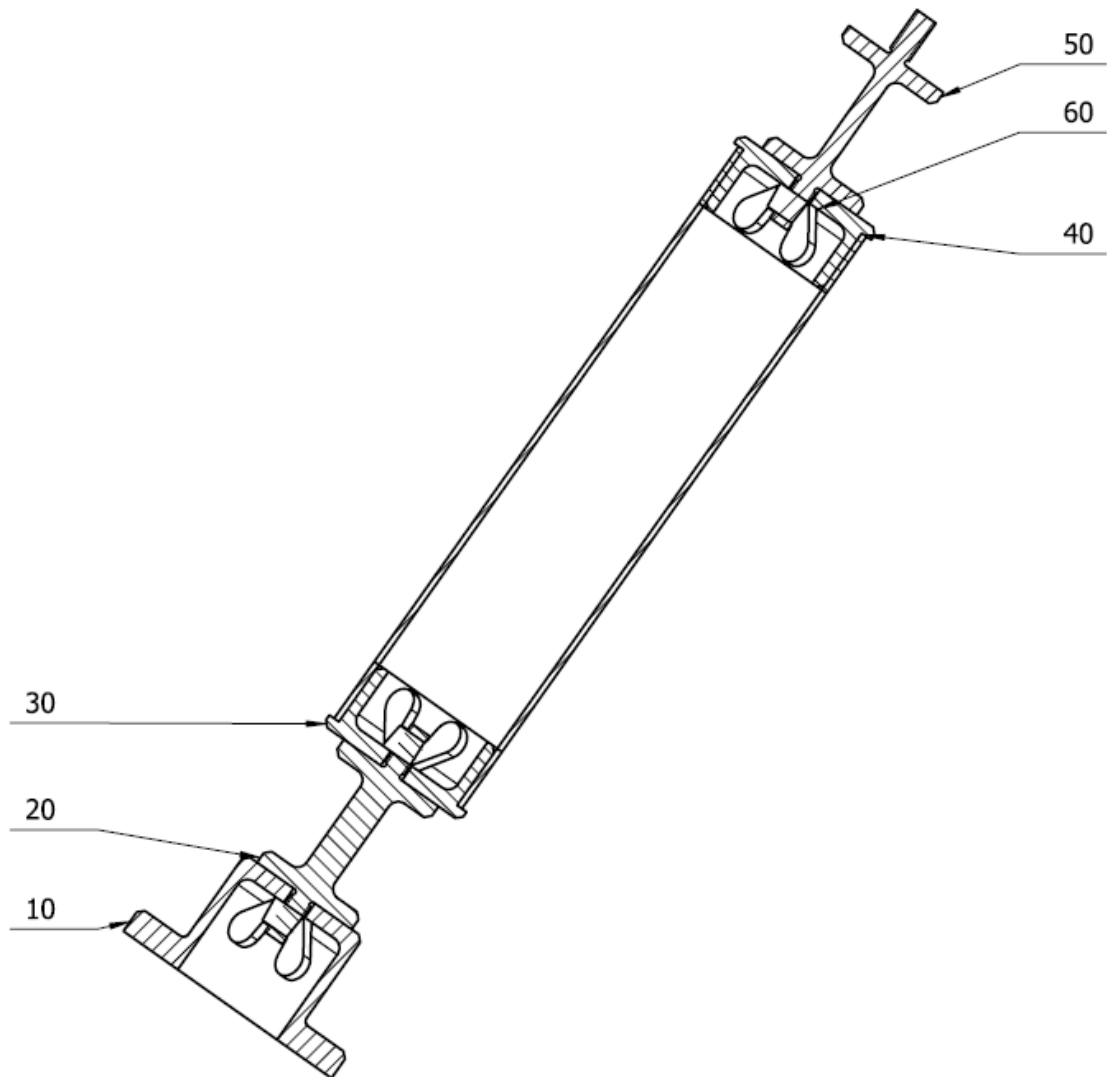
Technical assembly drawing of Spider for SINUS with base plate (10), blocks (20), clamps (30), pre-load plates (40), keystone (50), spring blades (60), fixation plates (70), cylinder head screws (80) to (110), and knurled screw (120) – based on [10].
